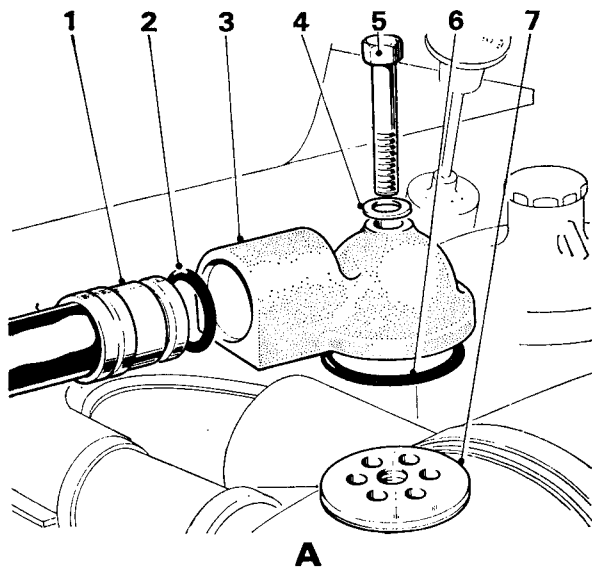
EXPLODED VIEW OF CRANKCASE EMISSION CONTROL PIPE
